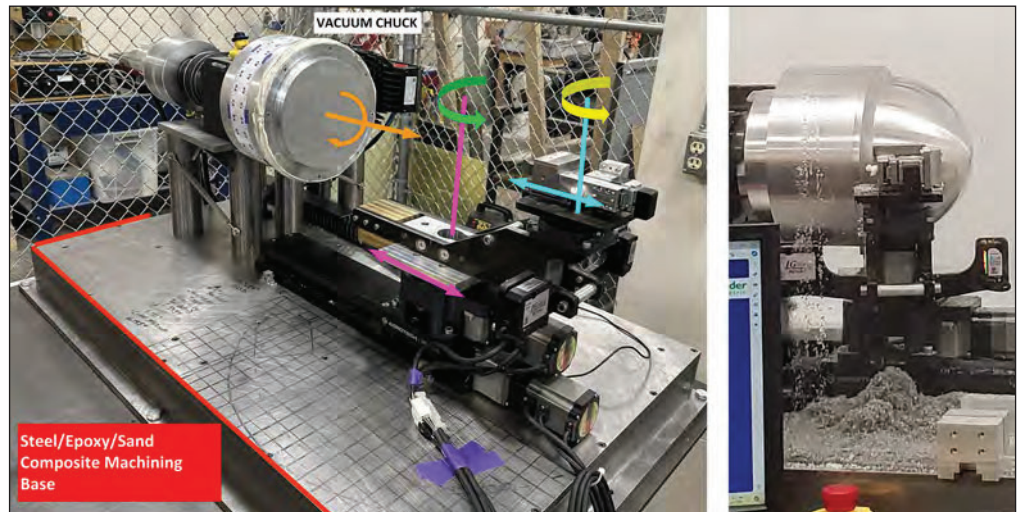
The testbed consists of a vacuum chuck capable of holding a hemisphere for internal or external machining (external machining shown on the right) and offers five degrees of motion.
